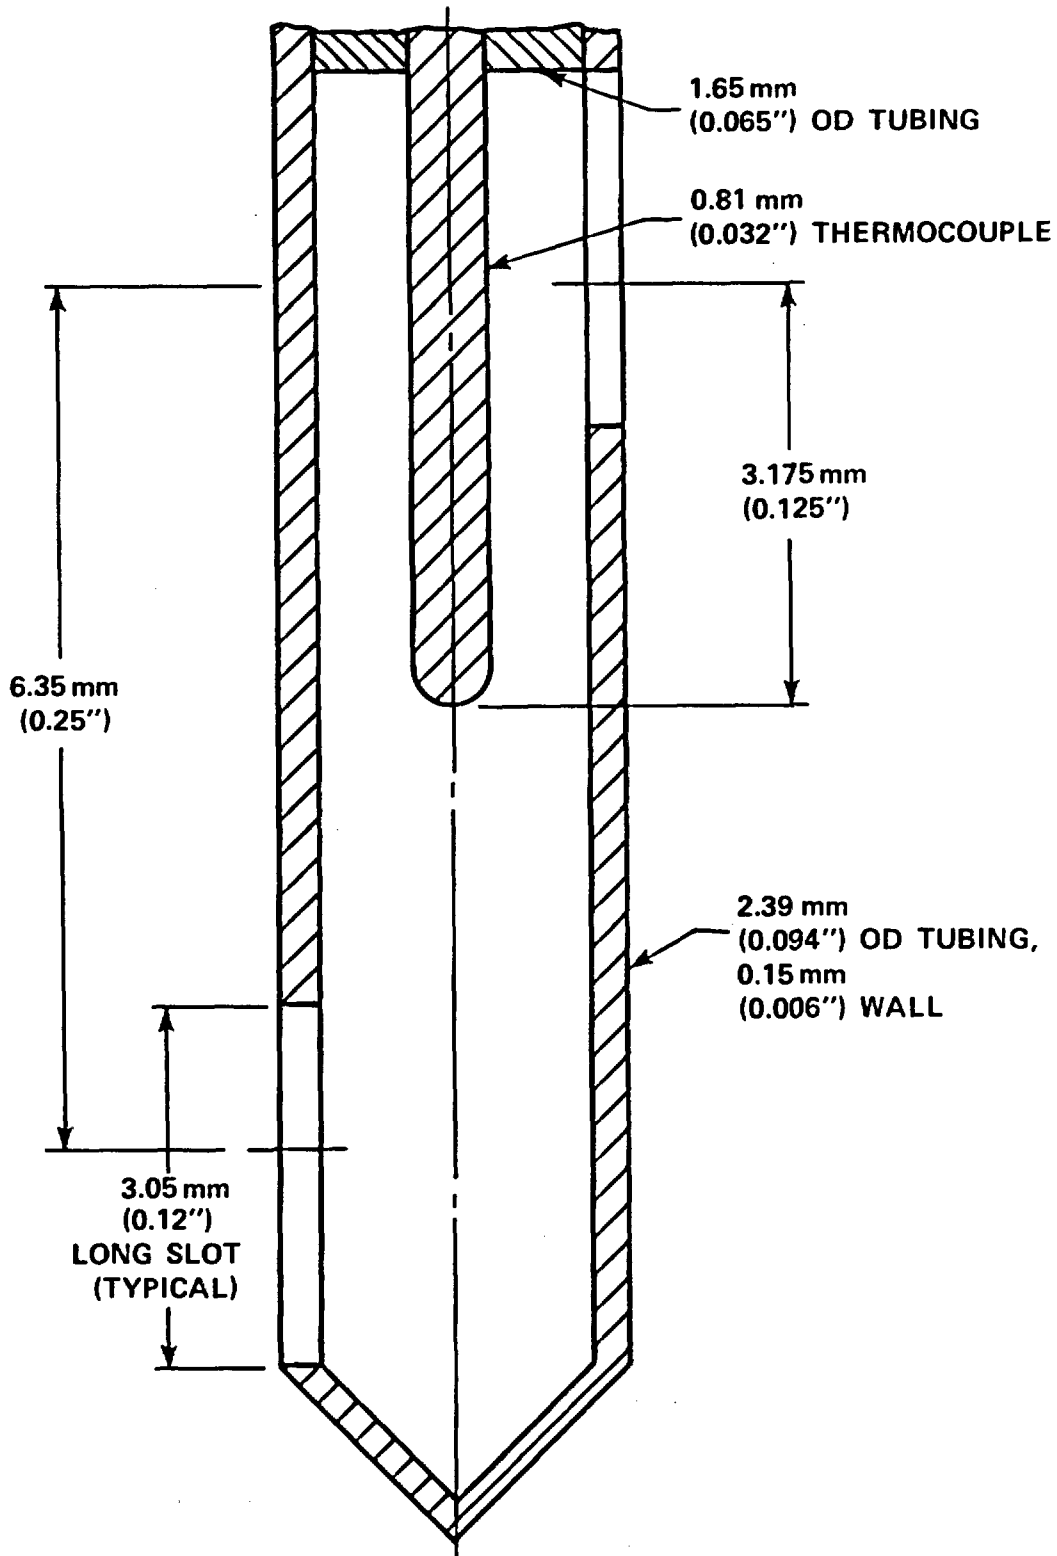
Steam Probe Design for 21-Rod Bundle Flow Blockage Task
